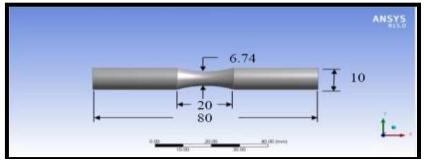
Fatigue test specimen dimensions in millimeter according to (DIN 50113) standard specification [12].
